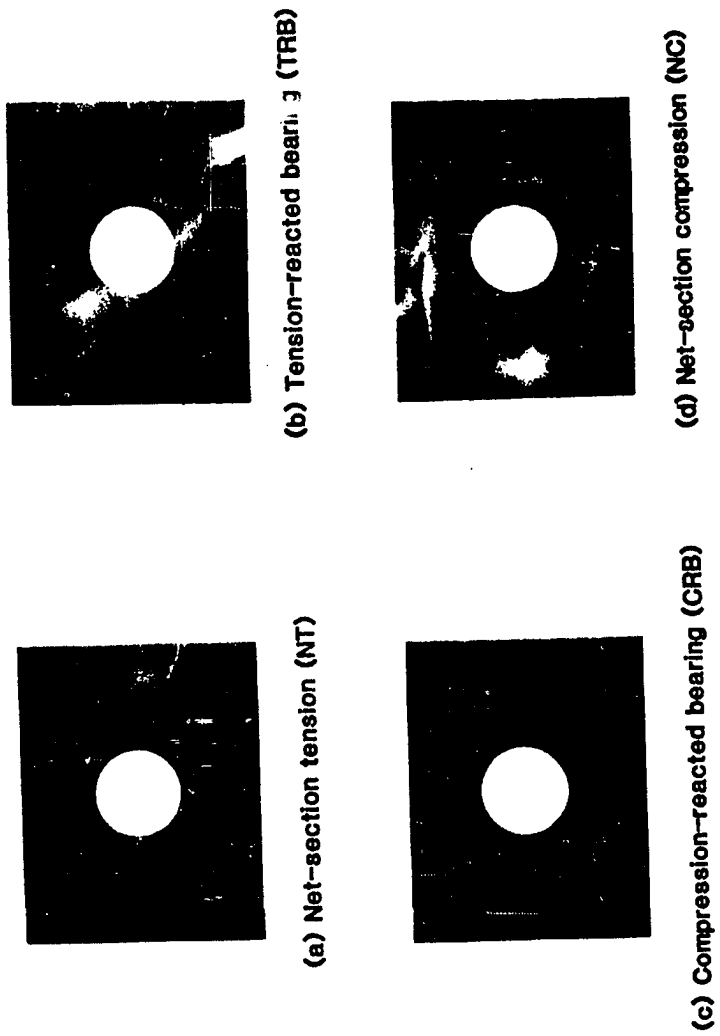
Radiographs of damage-onset at fastener hole.
